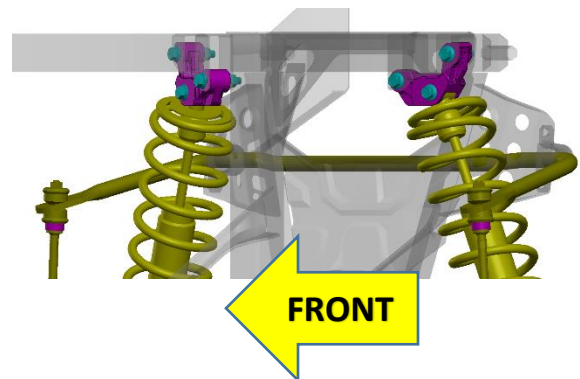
Blocks Installed into Rear Frame Shock Hangers
